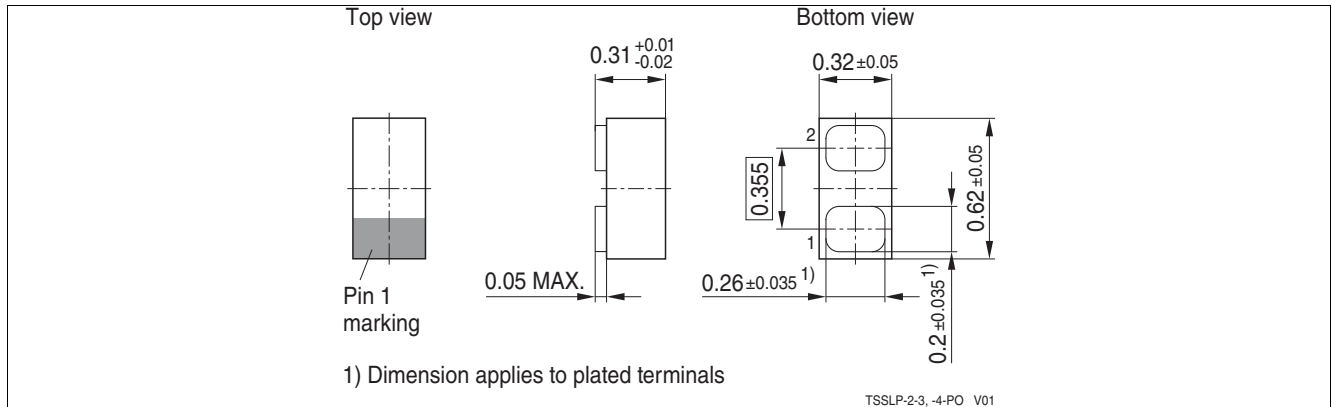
TSSLP-2-3 Package outline (dimension in mm)
